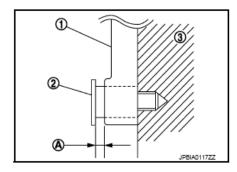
Identifying Slack Guide Mounting Bolt Gap Courtesy of NISSAN MOTOR CO., U.S.A.
